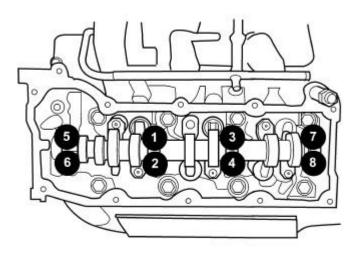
Identifying Valve Components Courtesy of CHRYSLER LLC
